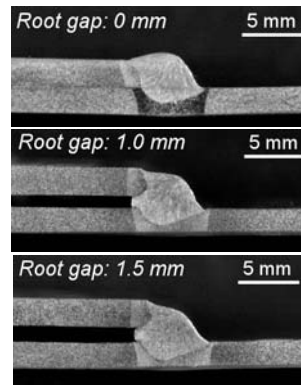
Excellent root gap tolerance with MIX-50 in lap fillet welding.
